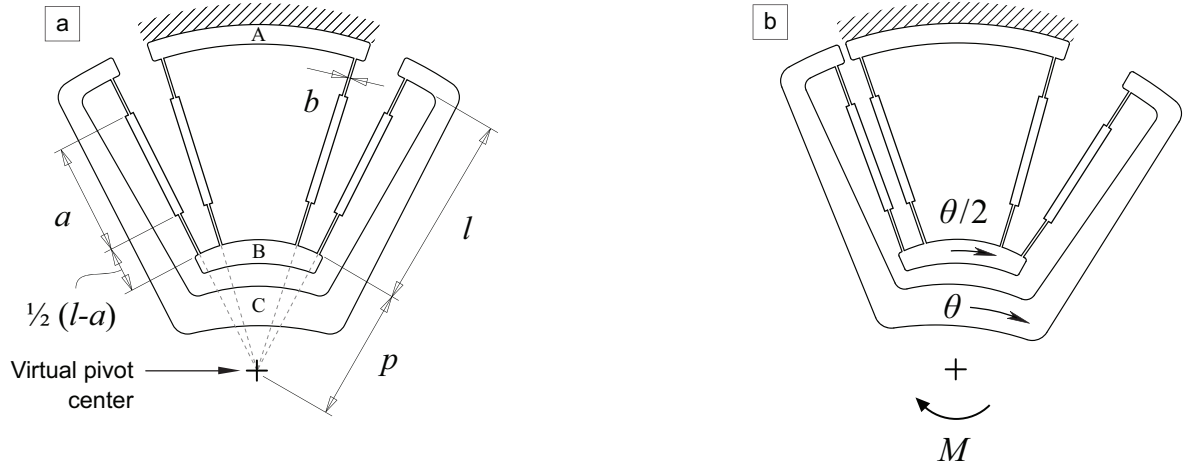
Four-beam flexural pivot with reinforced beams:(a) Four-beam flexural pivot with reinforced beam: The geometric parameters are the same as for the four-beam flexural pivot, with the additional parameter a , the length of the central reinforced structure; (b) Four-beam flexural pivot with reinforced beams under constrain: the torque M induces a rotation θ [21, 22]. The block A is fixed, the intermediate stage B is displaced by $\theta/2$, while the block C is displaced by θ .
